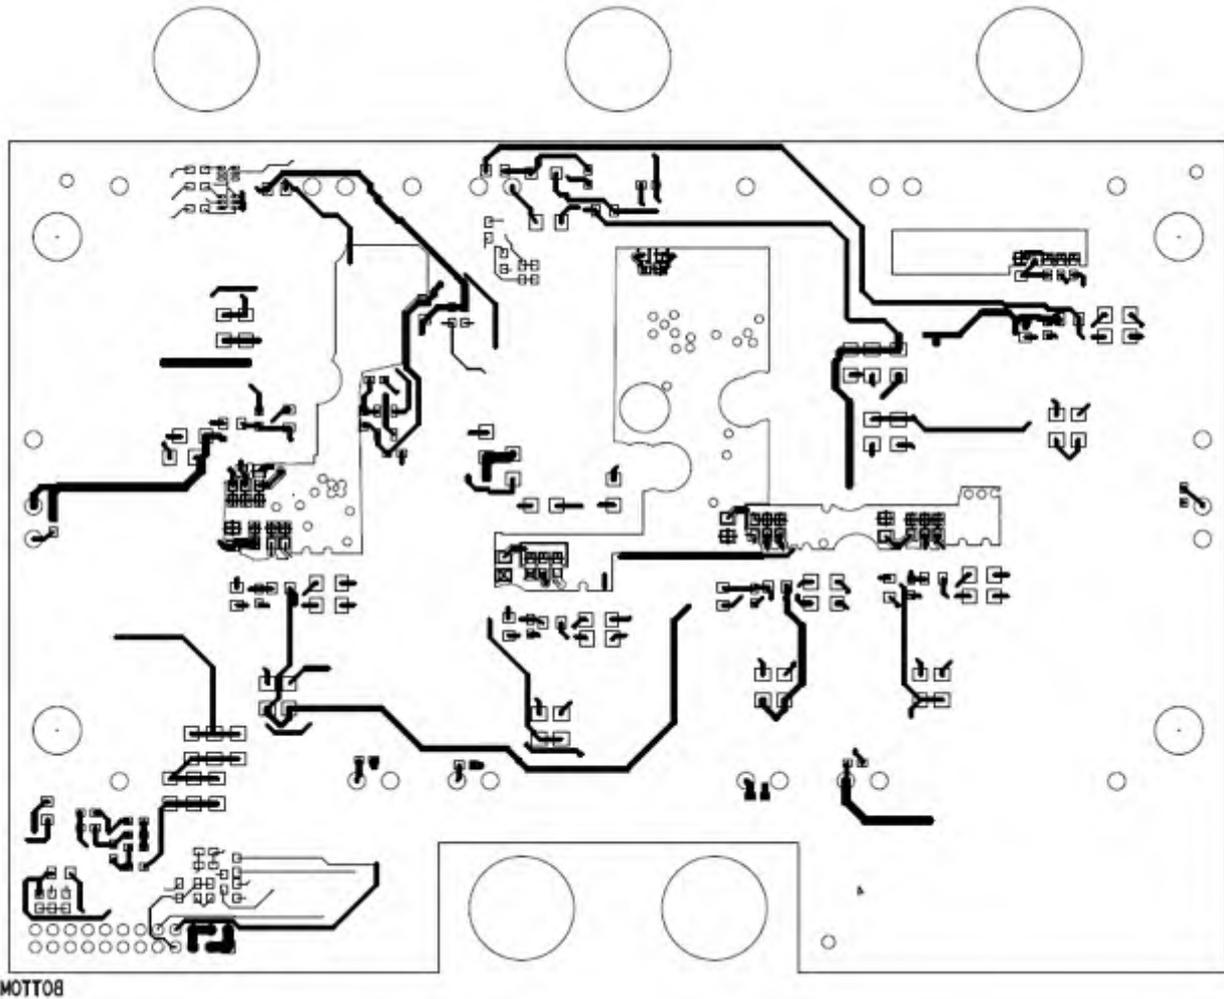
HybridPACK™1 IGBT driver – Bottom Layer 4
